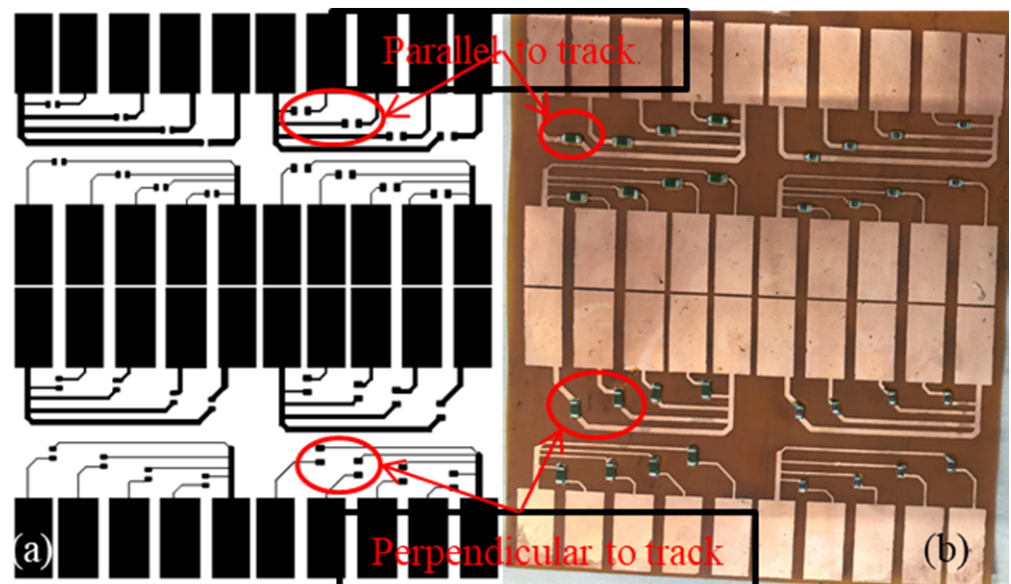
(a) Printed circuit design. (b) Photo of FPCB with soldered SMD resistors.
